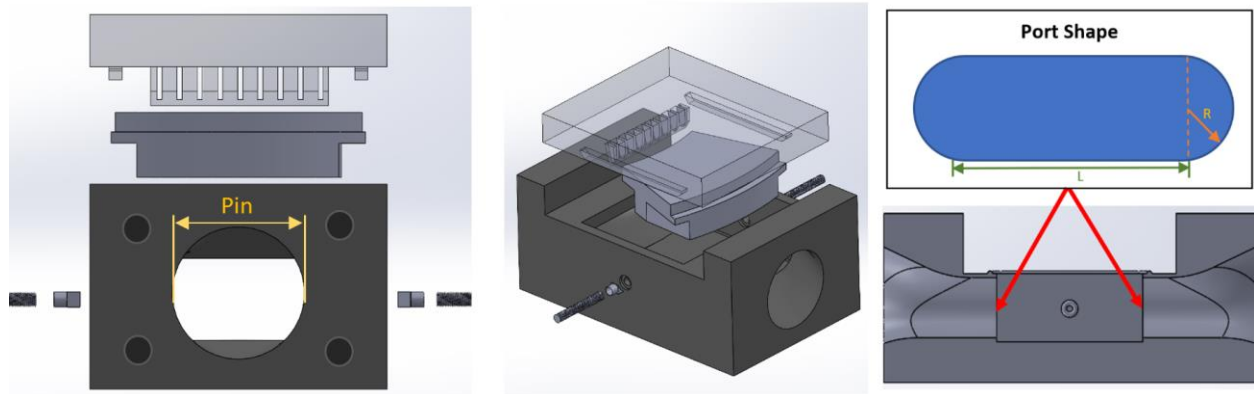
Exploded CAD model of the new test cell assembly with dimensioning and specifications.
